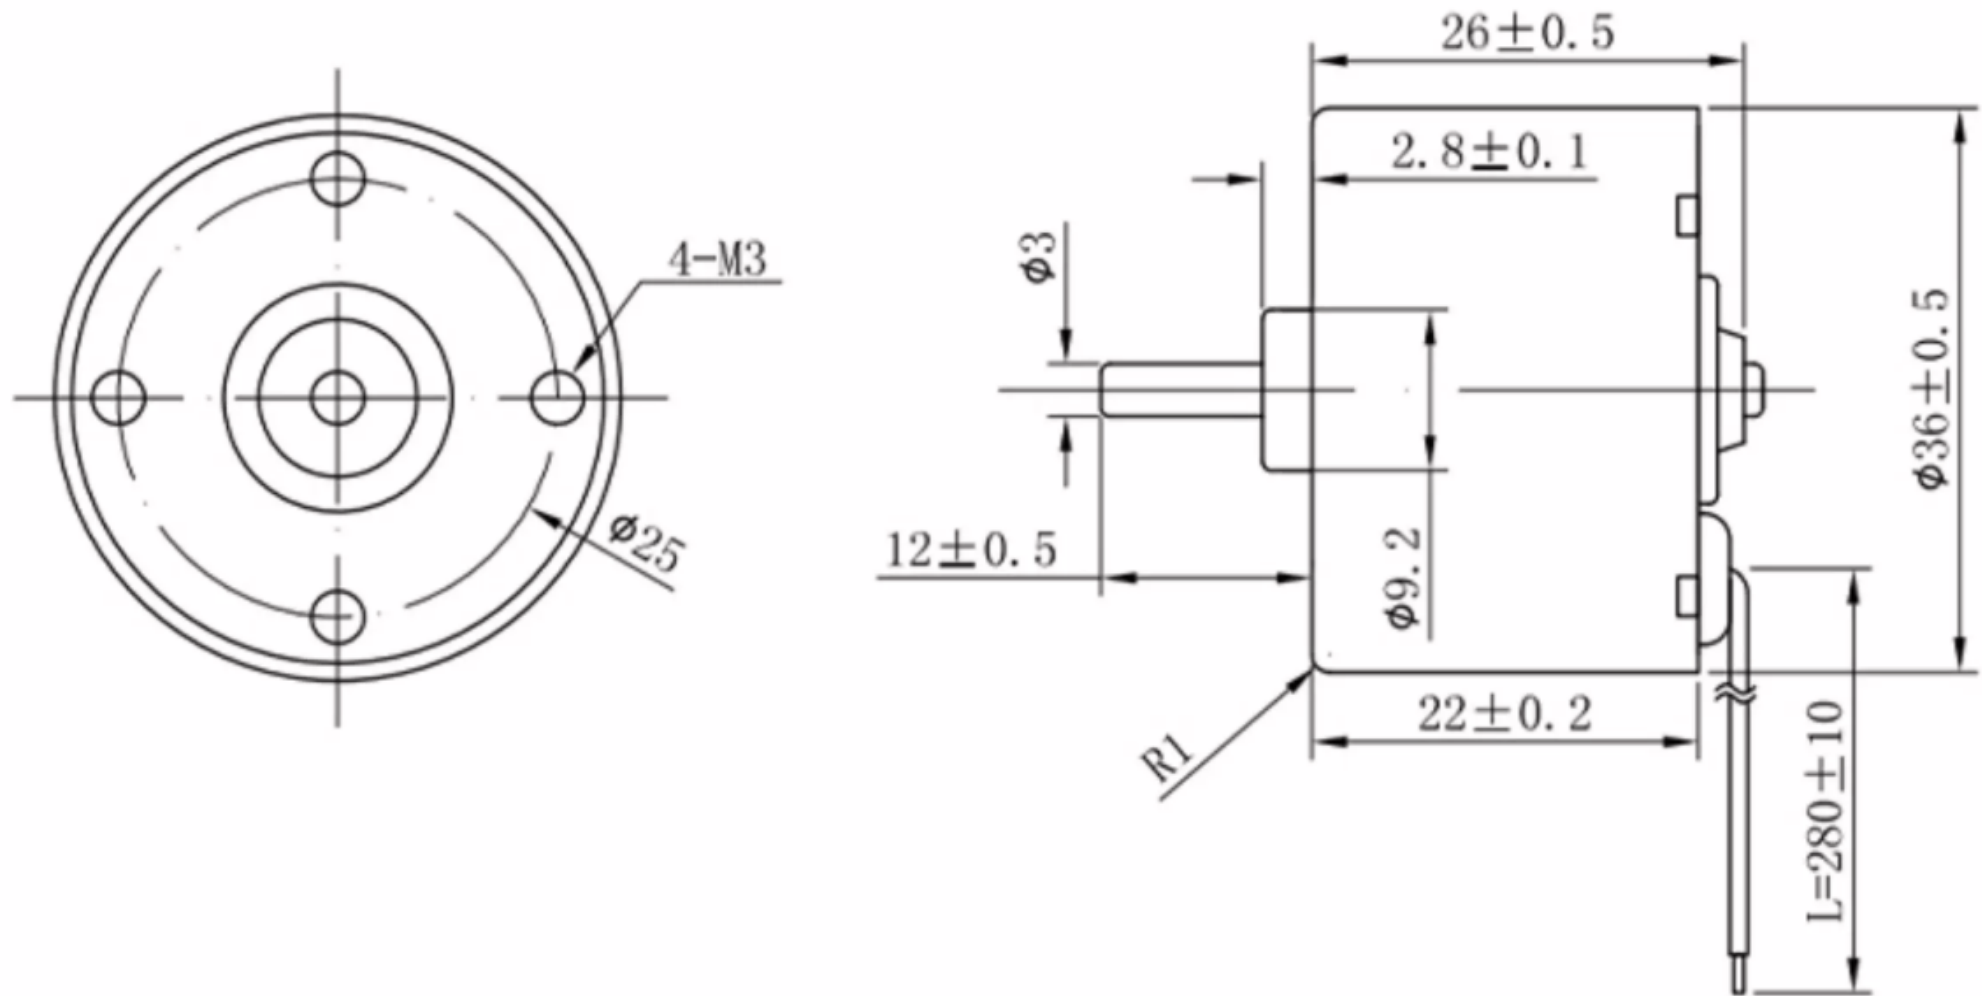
12 mm shaft length mechanical drawing. Dimensions are in mm unless otherwise specified.
